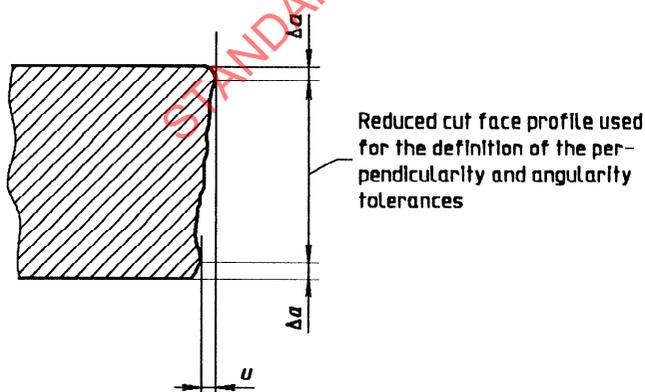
Definition of measuring area for perpendicularity and angularity tolerances
